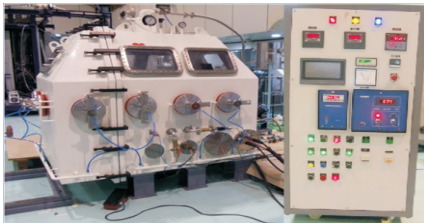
Indigenously developed welding glove-box.
